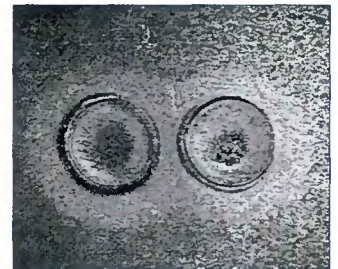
Potentially insufficiently spaced welds.
